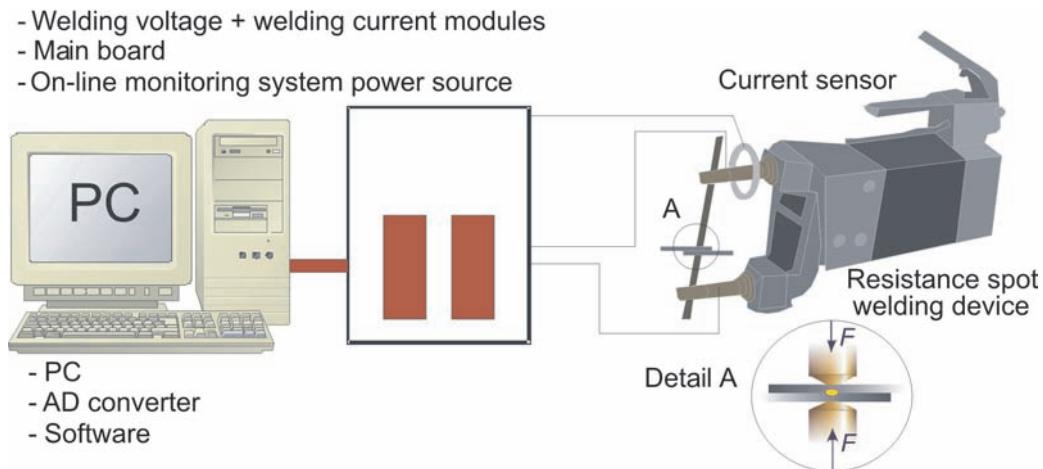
Scheme of on-line monitoring during resistance spot welding
